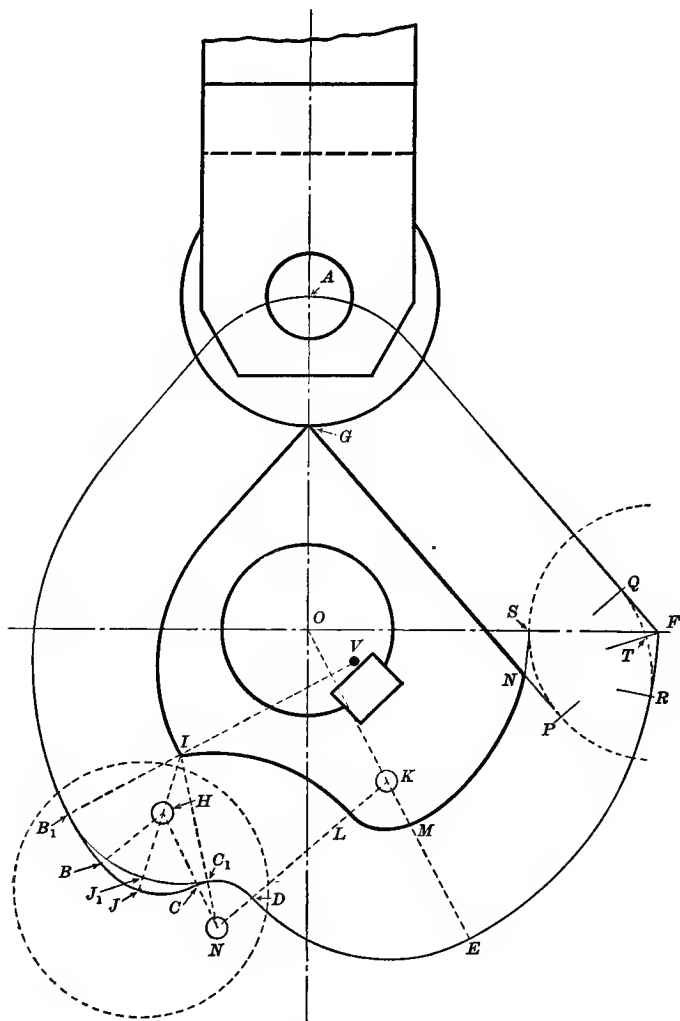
LIMITING SIZE OF FOLLOWER ROLLER
